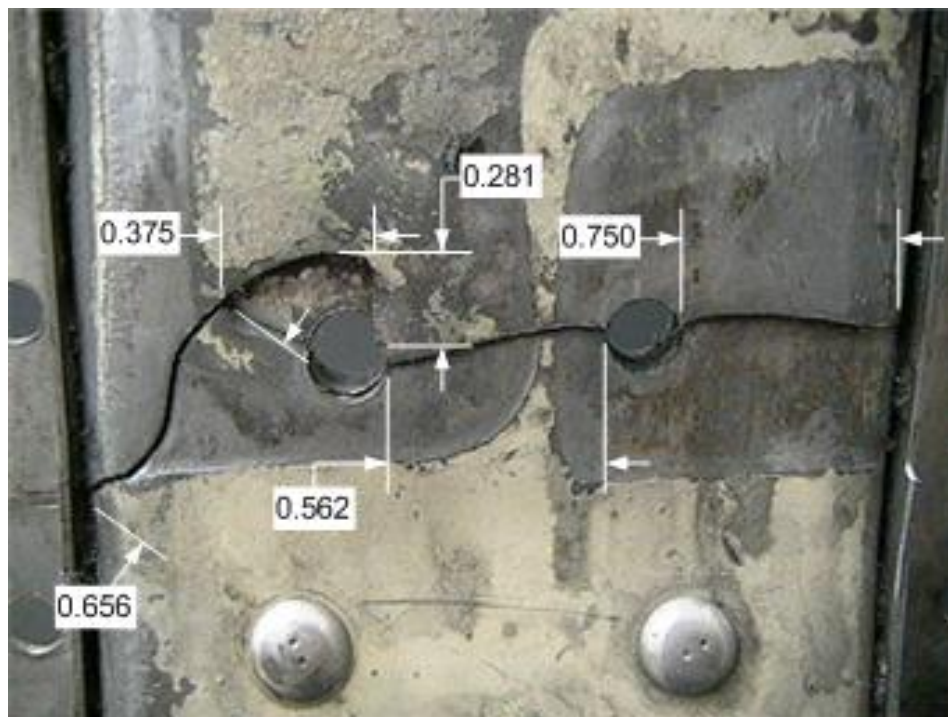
Cracked Cessna 402C Right Wing Inboard Engine Beam
